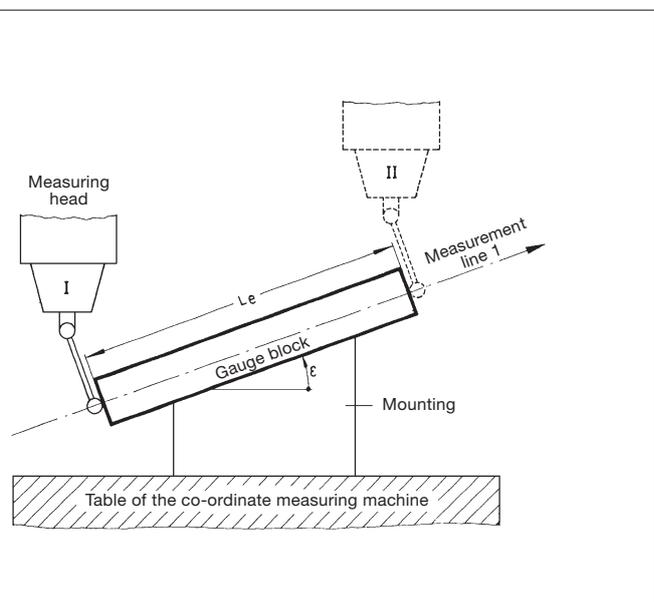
Individual gauge block arranged obliquely in three dimensions on the table of a co-ordinate measuring machine, showing an outside dimension L_e being measured.
